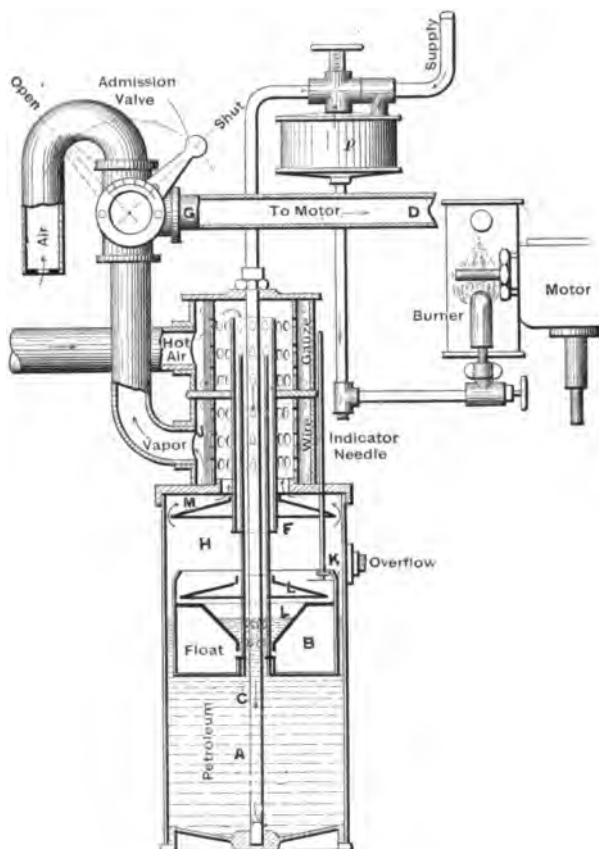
SECTIONAL VIEW OF THE CARBURETOR
